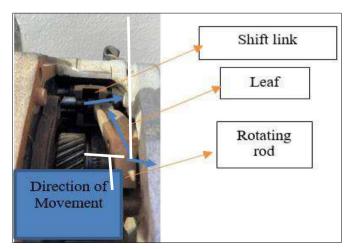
This is a diegram of how the fisrt gear is getting engaged from the lever.
